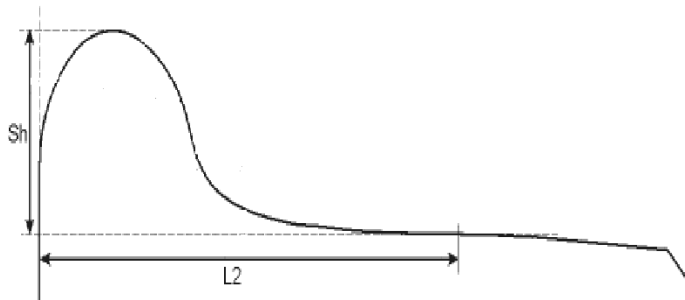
Wheel Condemn Gauge Drawing - Steep Flange Indication
